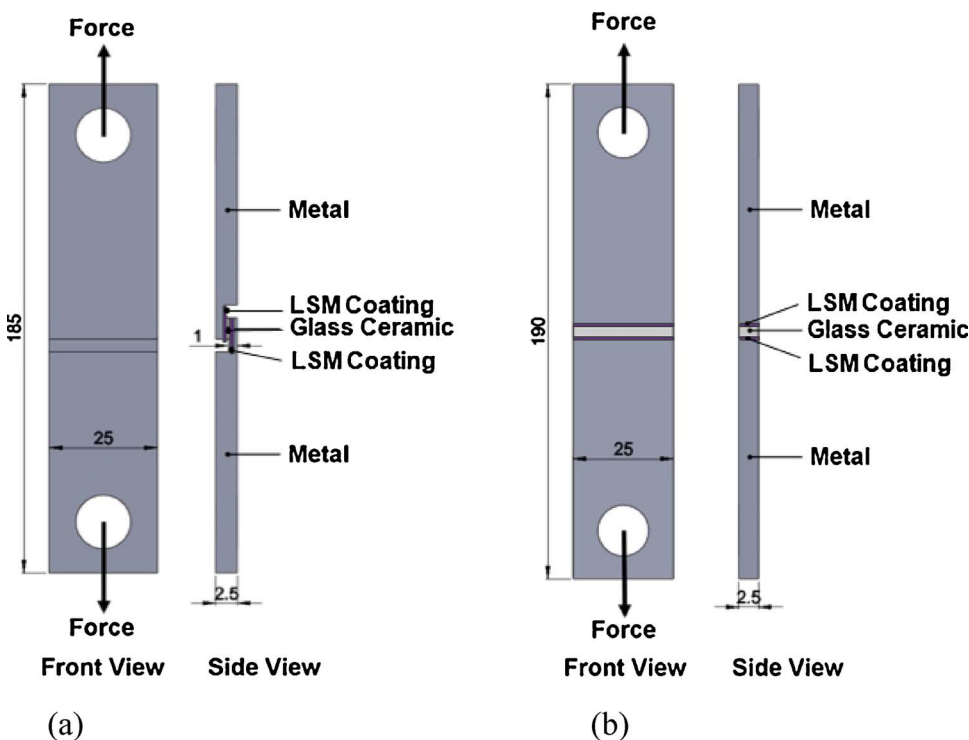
Schematic of two types of joint specimen: (a) shear specimen; (b) tensile specimen. (Dimensions: mm).
